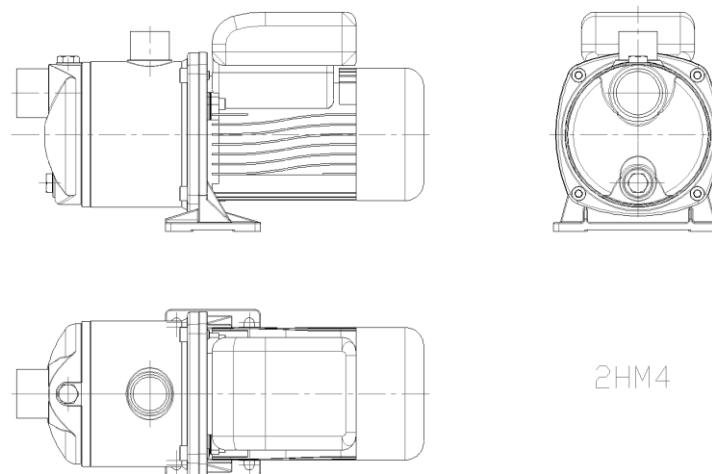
Mechanical drawing of the RO sub- unit feed pump
